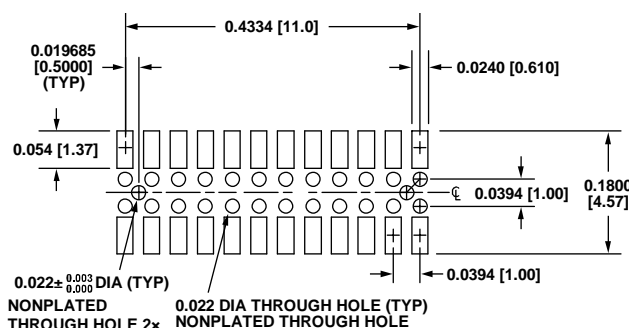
Suggested Layout and Mechanical Design when Using Samtec CLM-112-02-G-D-A for the Mating Connector
